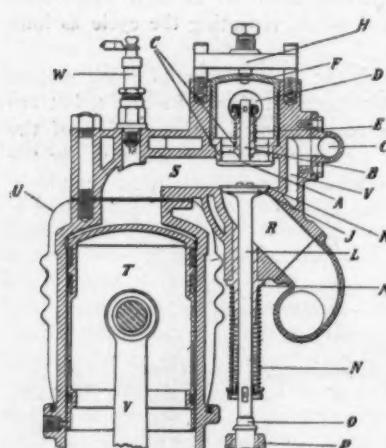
VERTICAL SECTION OF CYLINDER OF FOUR-CYCLE MOTOR WITH AUTOMATIC INLET VALVE.
